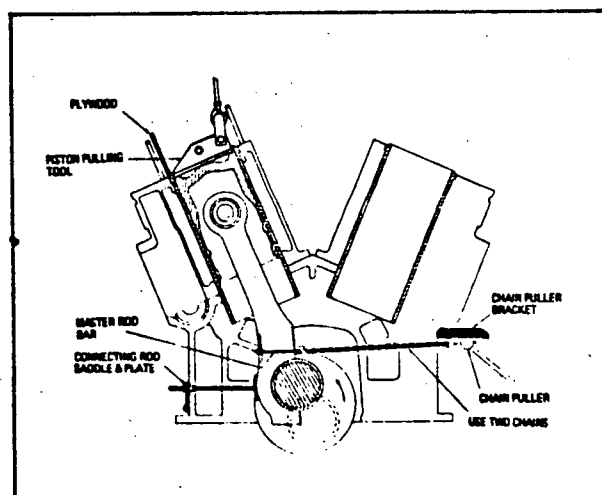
C-5. Tools Installed For Piston and Master Rod Removal.
